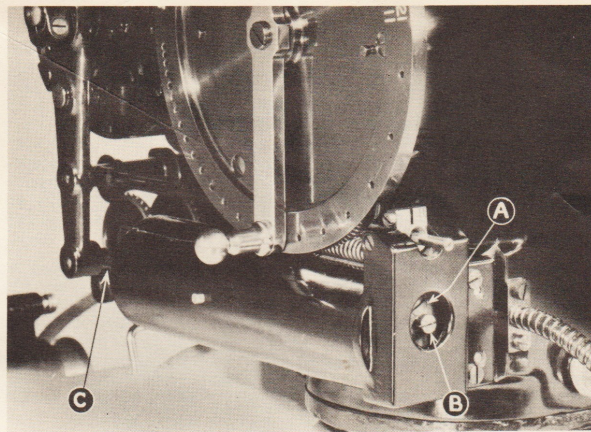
ADJUSTMENT OF CLUTCH MAGNET.
